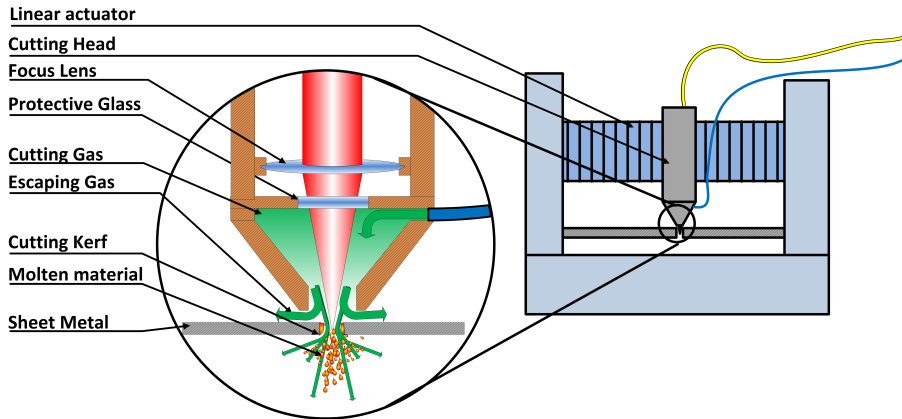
A setup for traditional laser cutting. Notice the use of a cutting gas to eject the molten material from the cutting kerf.
